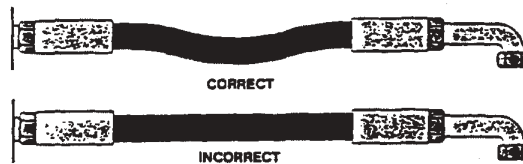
HOSE AND MACHINE TOLERANCES
